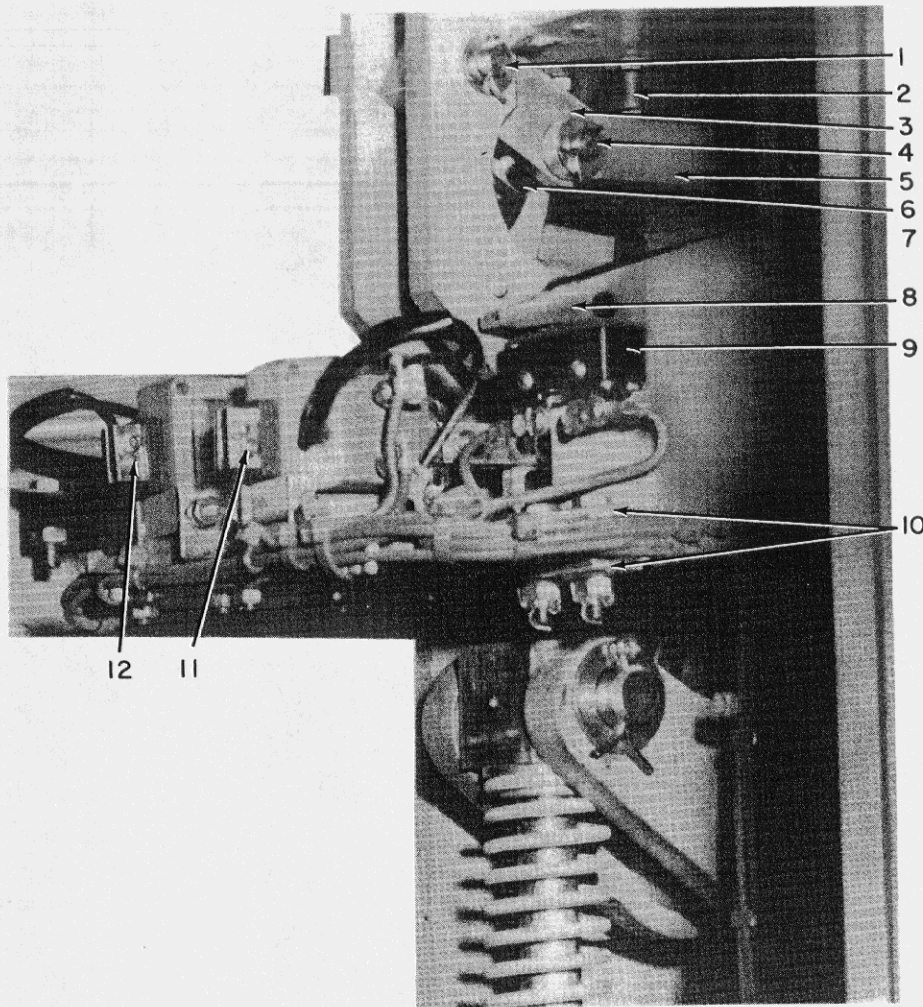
Dual trip latch assembly, right front view (for MA-13-8 and MA-13-8A)
